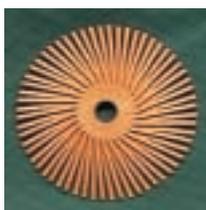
Correct angle of the disc fingers when mounted on the mandrel assembly. Note the disc fingers are angled toward the direction of the grinder rotation.
